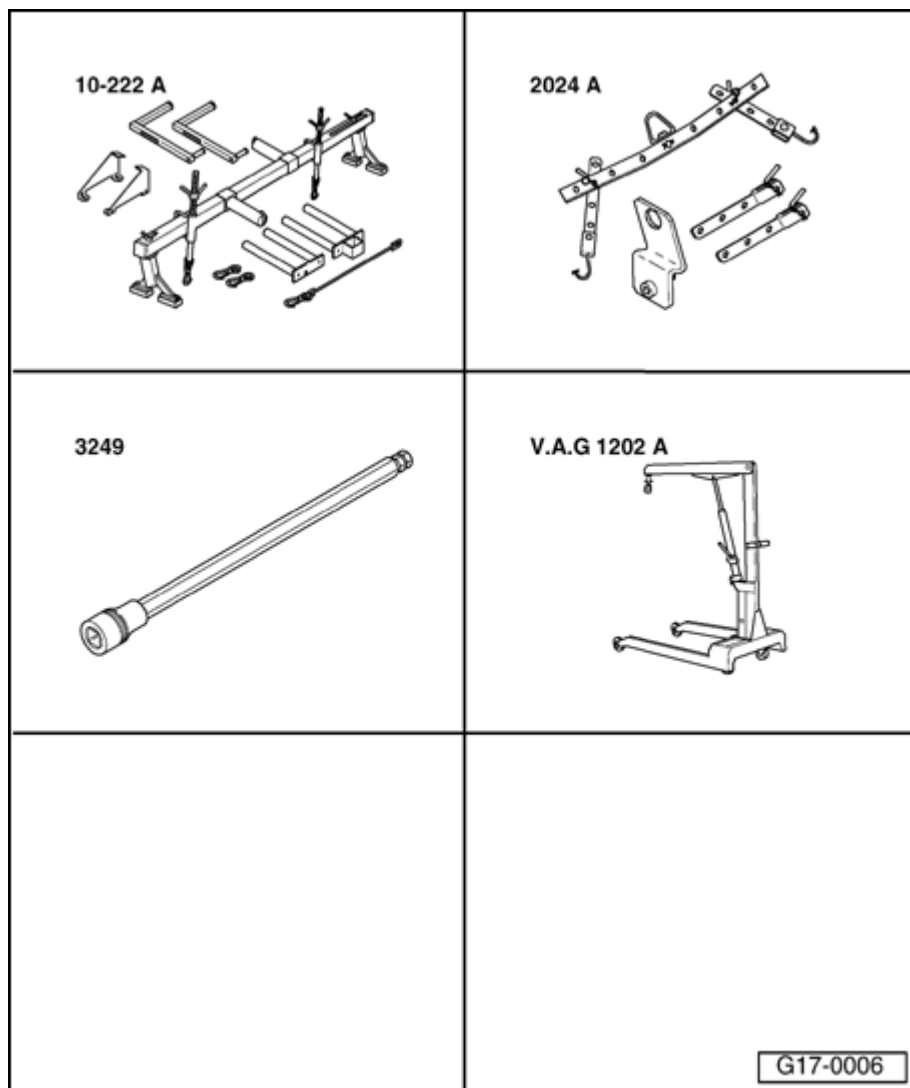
Identifying Special Tools - Oil Pan, Removing And Installing
